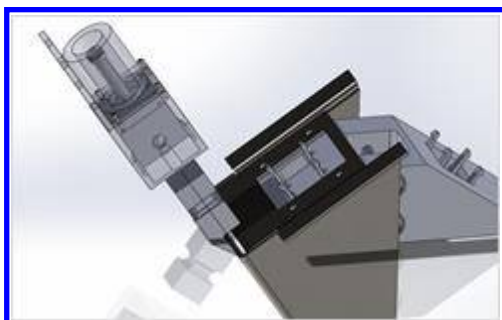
Dual-shell BiBlade concept during sampling and removal of inner sample canister
